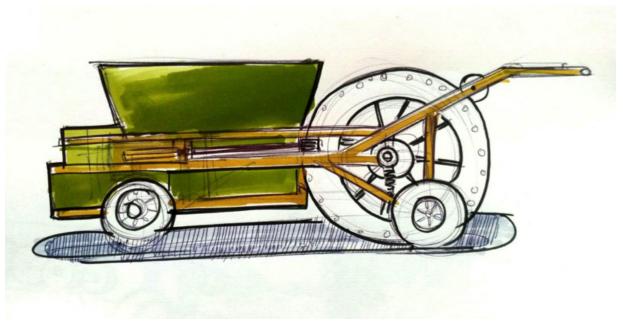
(Ideation of side view of modified cart type brick moulding machine)
